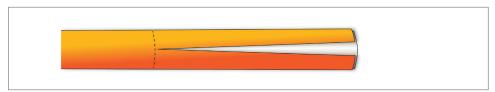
Step 1 (HV BM 1.2+S, HV-): Removing outer sheath and protective foil
